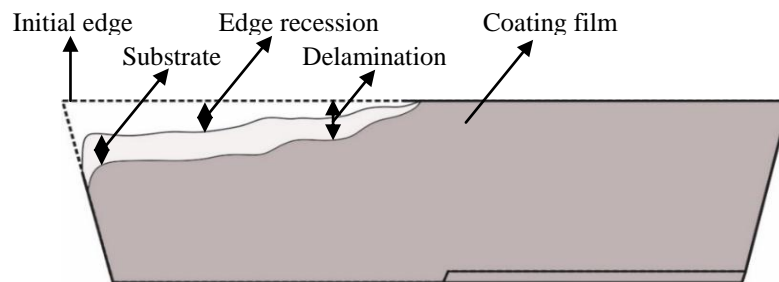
Schematic wear measurement on the clearance face of coated carbide tools.
